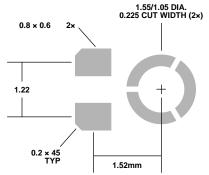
Suggested Solder Paste Stencil Pattern Layout Dimensions shown in millimeters
